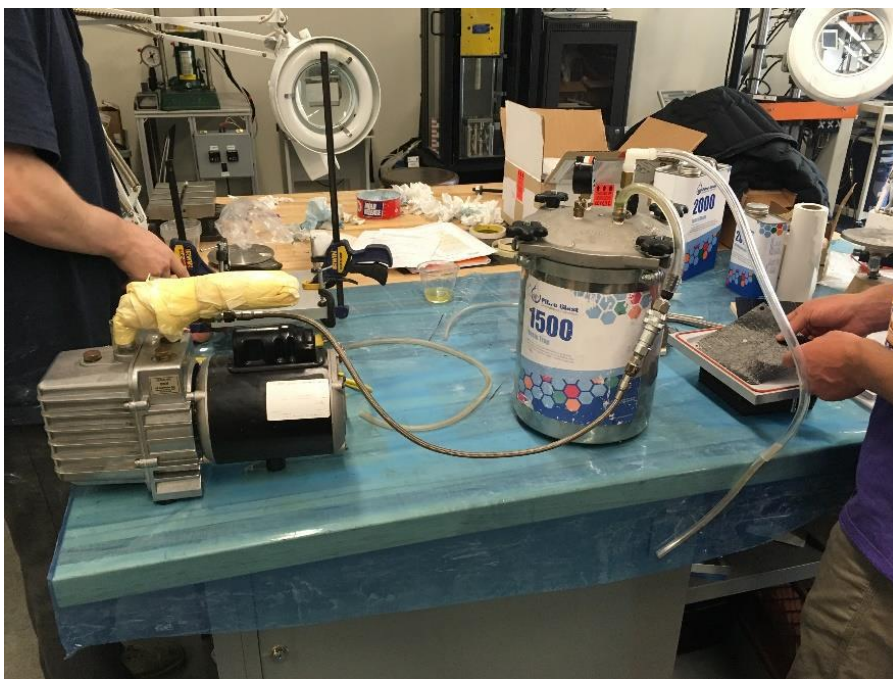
Resin transfer setup showing pump, catch pot, and mold
